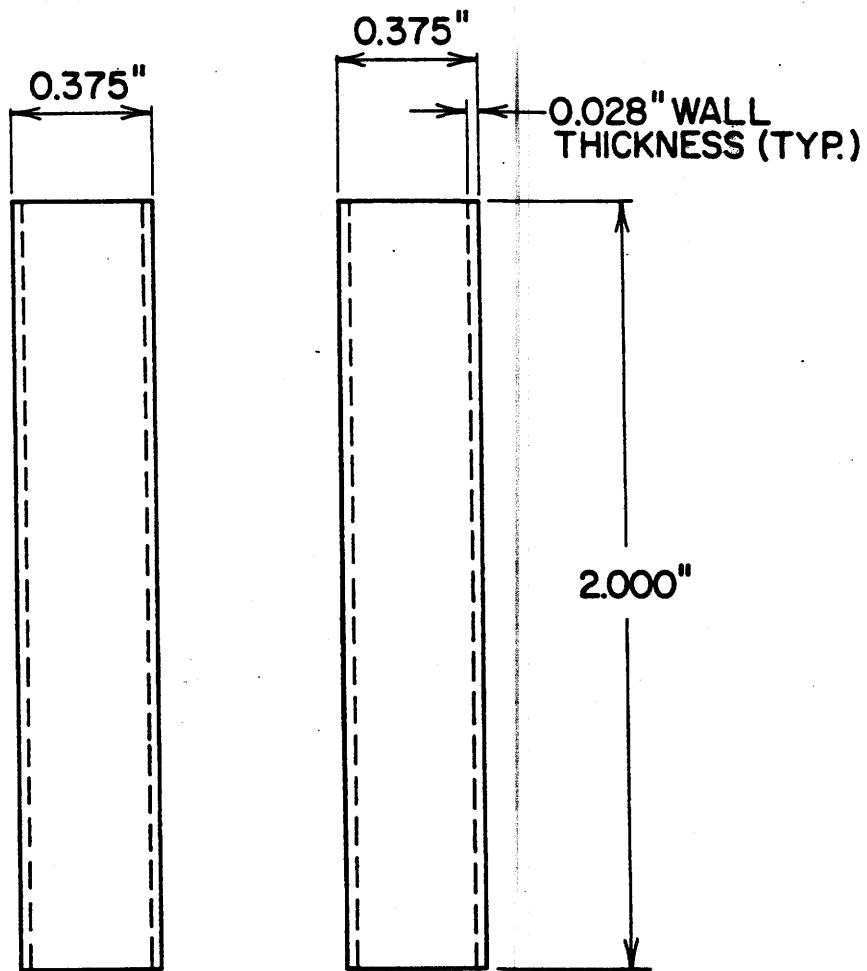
Manufacturing drawings--transducer assembly (SLD and soil gauge inner sleeve).
